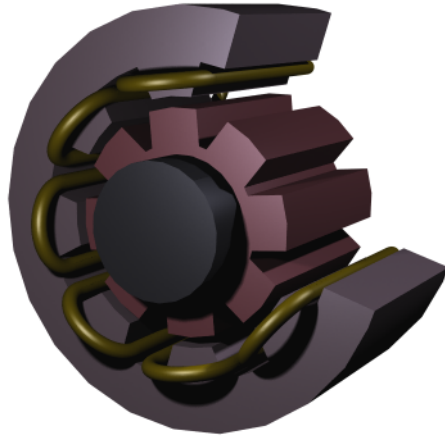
Drawing of a generator showing how the rotor, stator, and stator winding are constructed.
